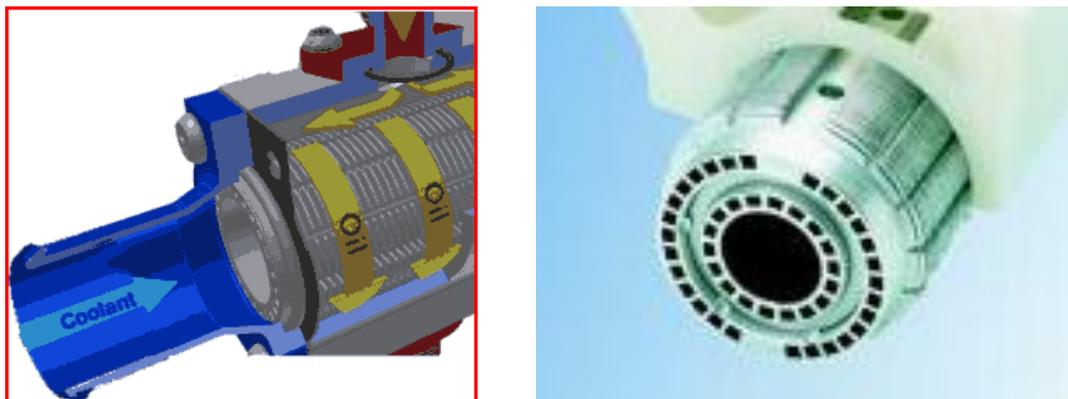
Laminova heat exchanger, usually used as oil cooler or intercooler in engines.
